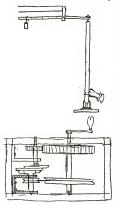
Huygen's lens-figuring equipment. (Above) Arrangement for polishing with the băton; pressure is intereased by moving the weight to the right, c 1660; (below) polithing-machine; the gear drive rotates the polisher, while the belt turns the lens mounted on the lower spindle. 1660.
